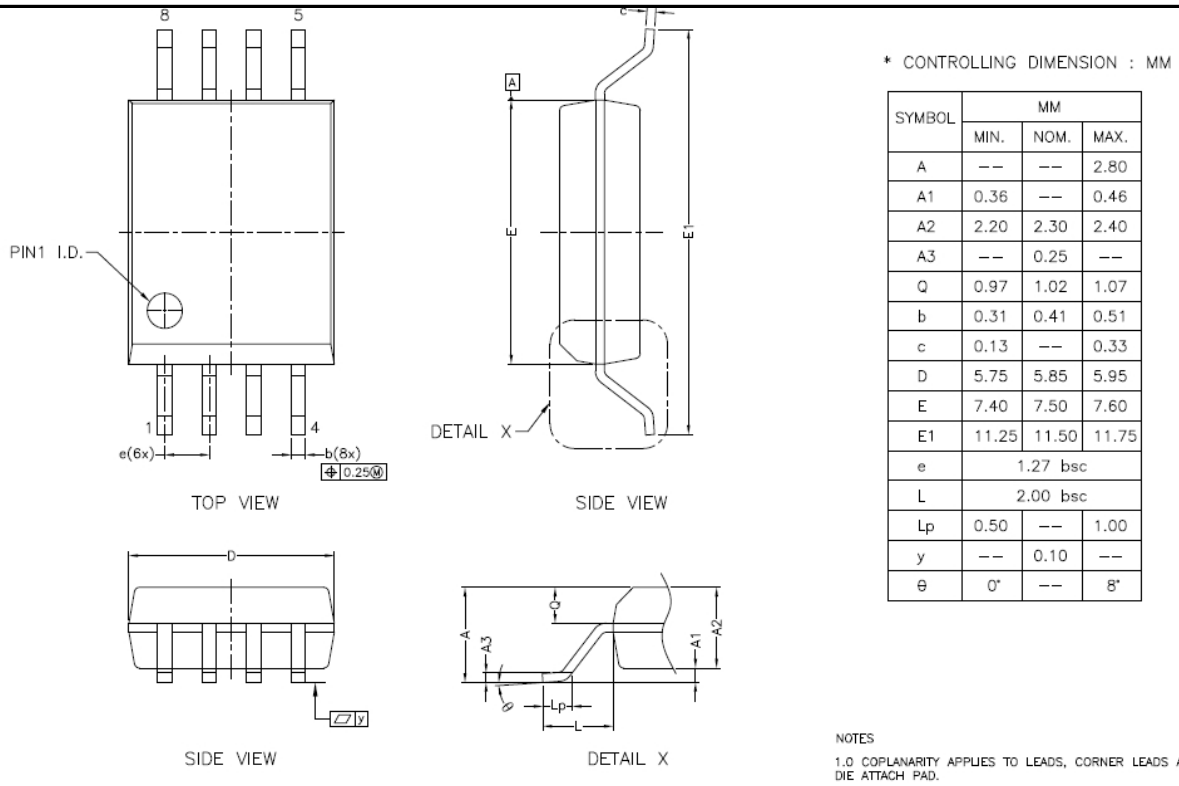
SOW8 Package Shape and Dimension in millimeters
